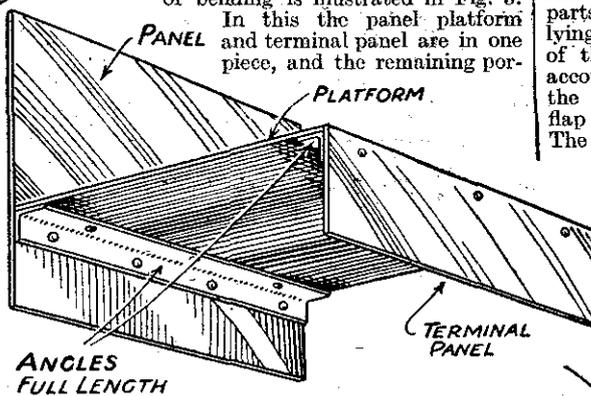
A metal chassis using angle-irons instead of bending the aluminium.
